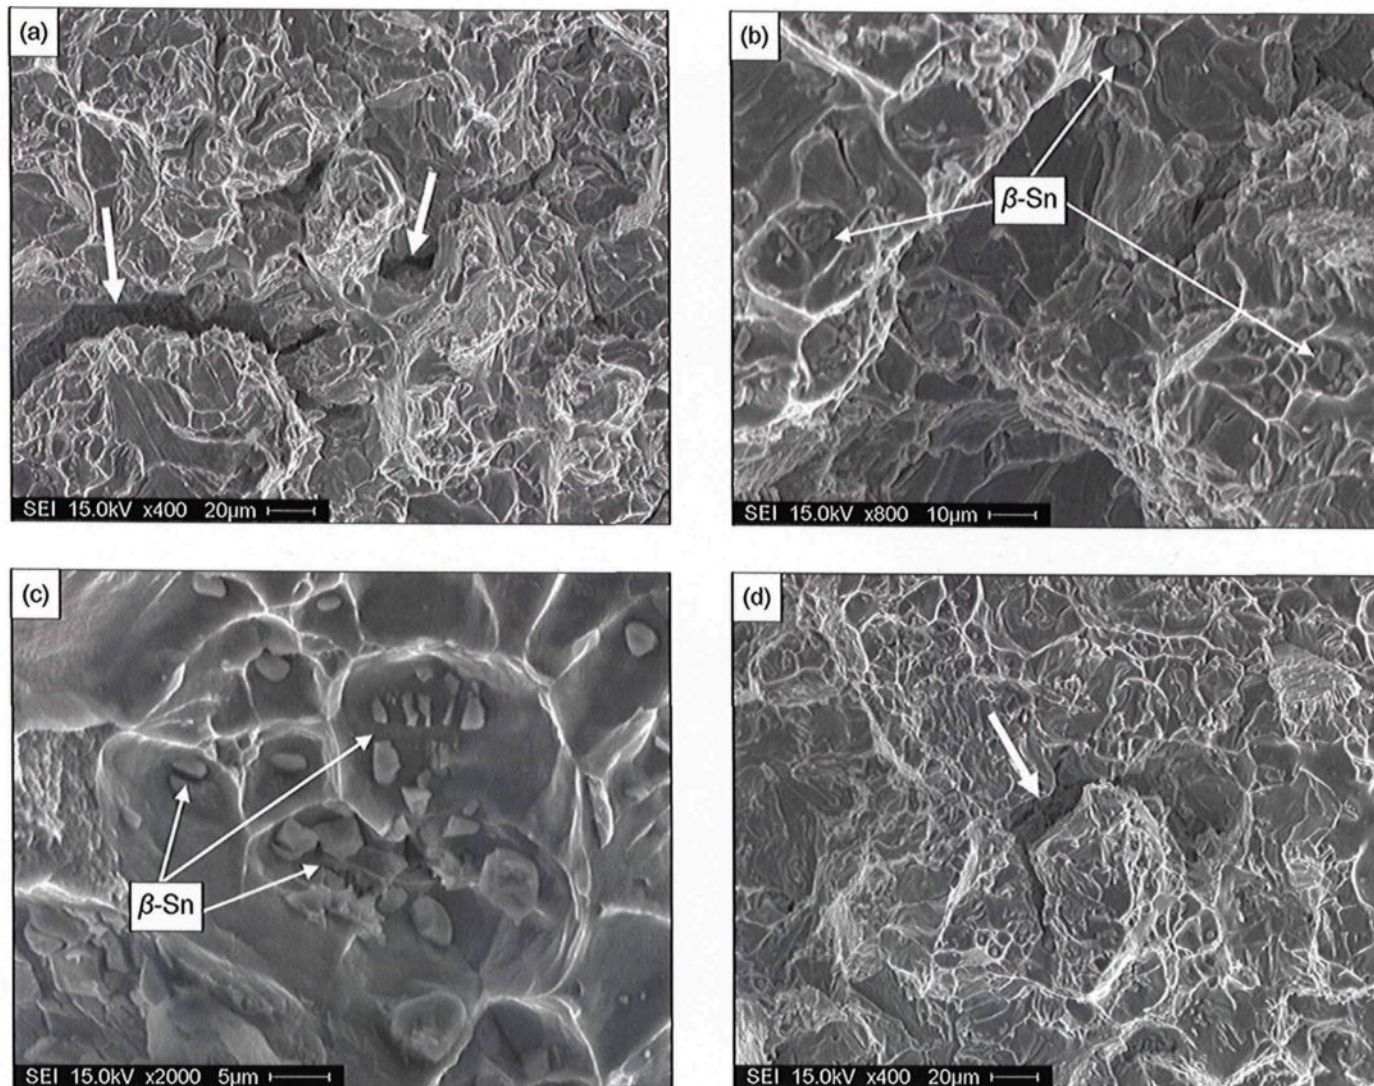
(a) Fracture surface of A41 alloy sample near the crack initiation side; (b) presence of β -Sn inside the dimples; (c) higher magnification micrograph showing a large number of β -Sn particles located within coarse dimples; and (d) fracture surface of A41 alloy sample near the sample center.
